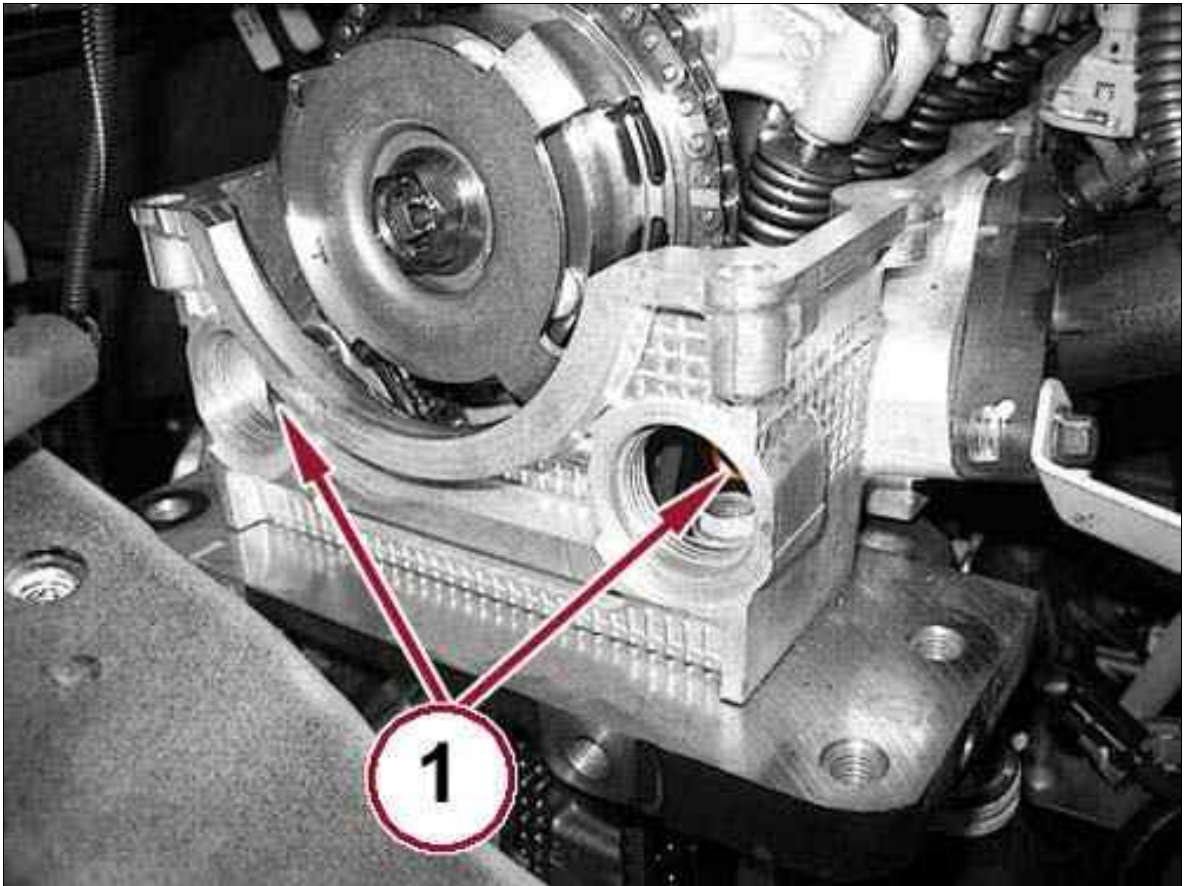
Access Caps For Timing Drive Chain Pad Fixing Screws
